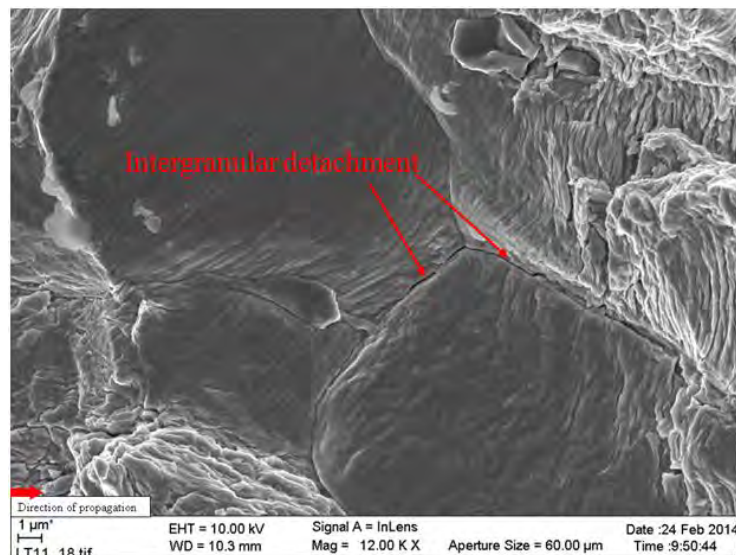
The fracture surface of CT specimen at 12000x magnification for crack propagation in base metal.
